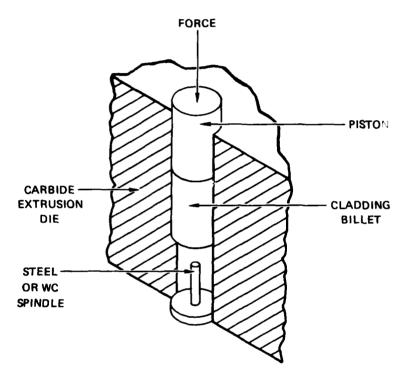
Spindling cladding billets for fabrication into clad-core billets.
